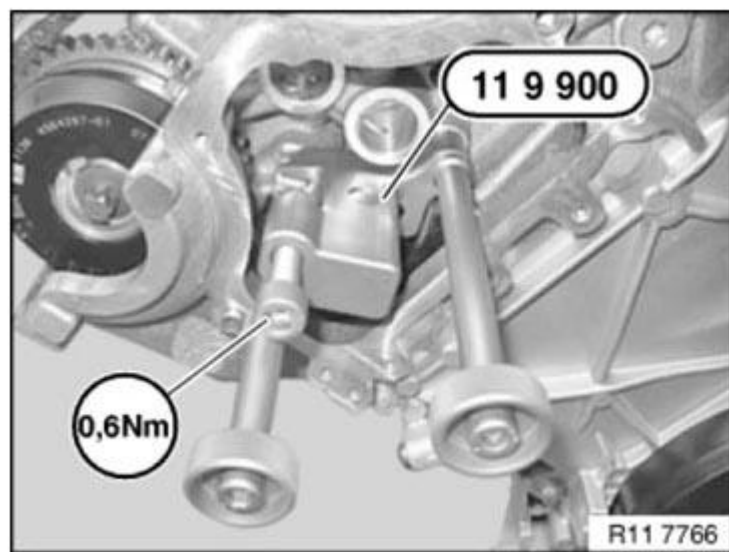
Preloading Hexagon Socket Screw With Special Tool 00 9 250 To 0.6 Nm
